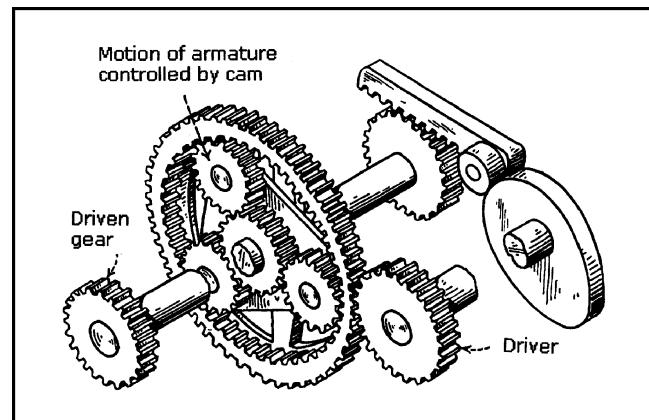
A special planetary-gear mechanism: The principal of relative motion of mating gears illustrated here can be applied to spur gears in a planetary system. The motion of the central planet gear produces the motion of a summing gear.
